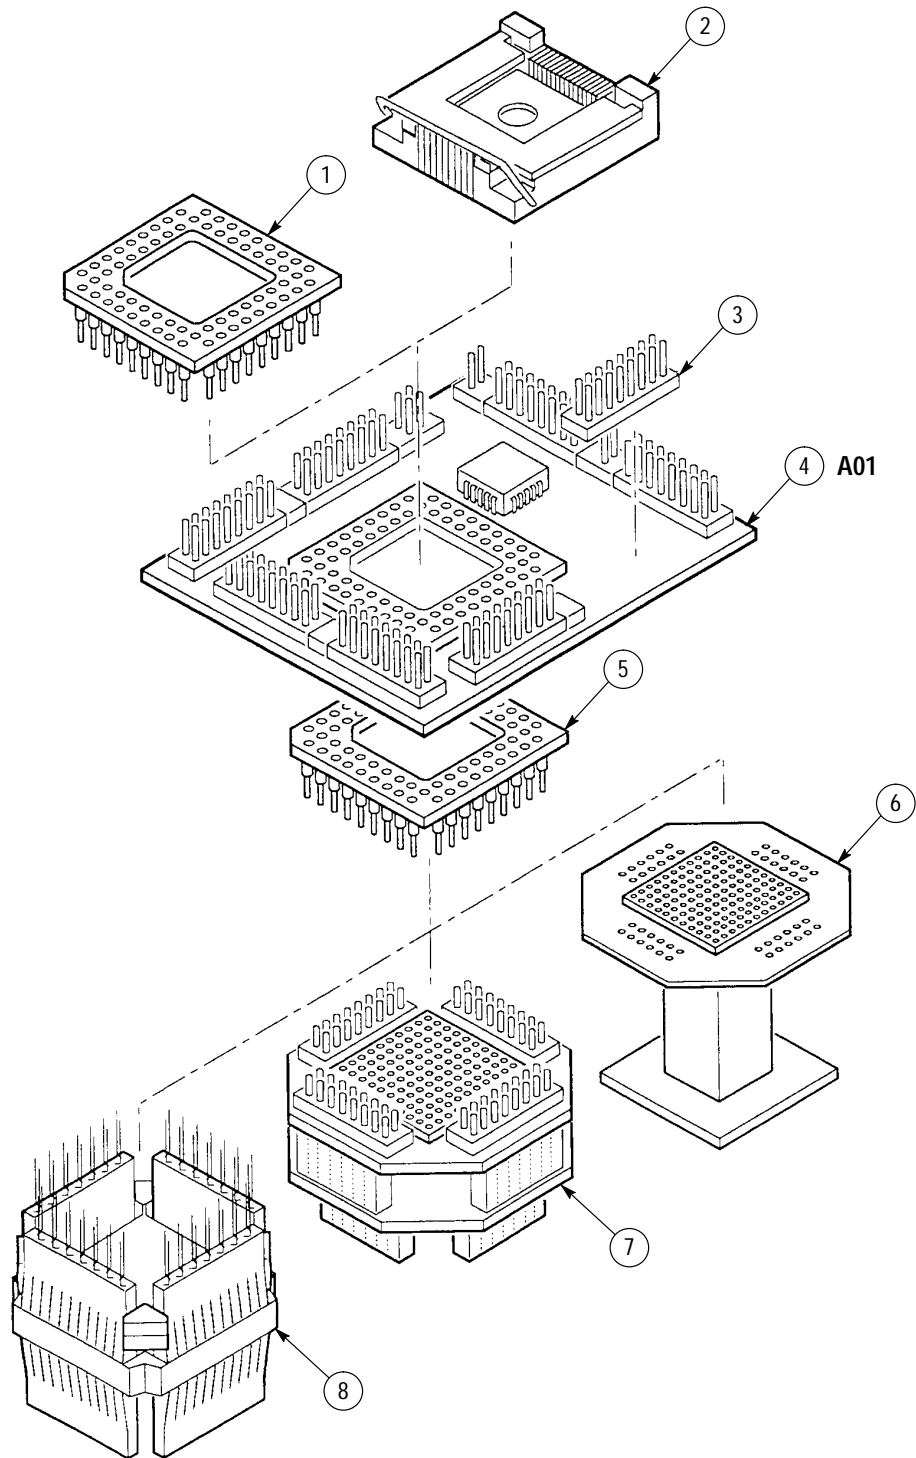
80186/80188 PGA probe adapter exploded view
